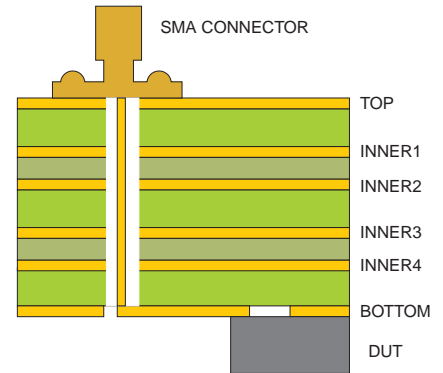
the test board is a 6 layer design with 4 inner layers to handle power and ground. The DUT is mounted on the bottom. The illustration is not to scale: the thickness of the total board is typically a few mm.
